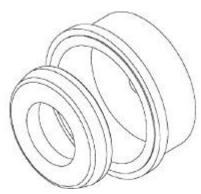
INSTALLER, SEAL - 8349 Courtesy of CHRYSLER LLC
